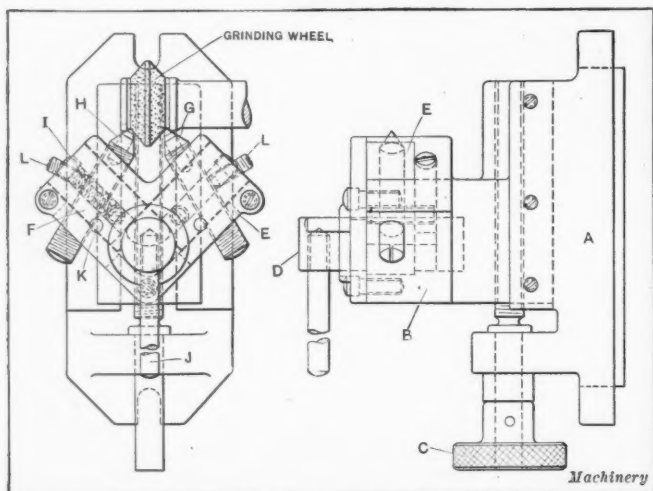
Detail of Double Angle Wheel Truing Device shown in Fig. 16
